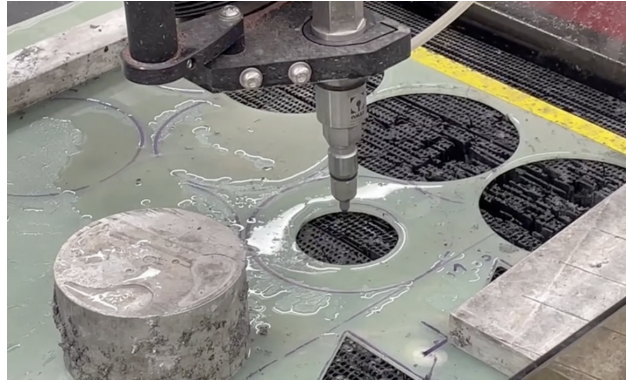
Using the waterjet to cut out the bulkheads and centering rings
